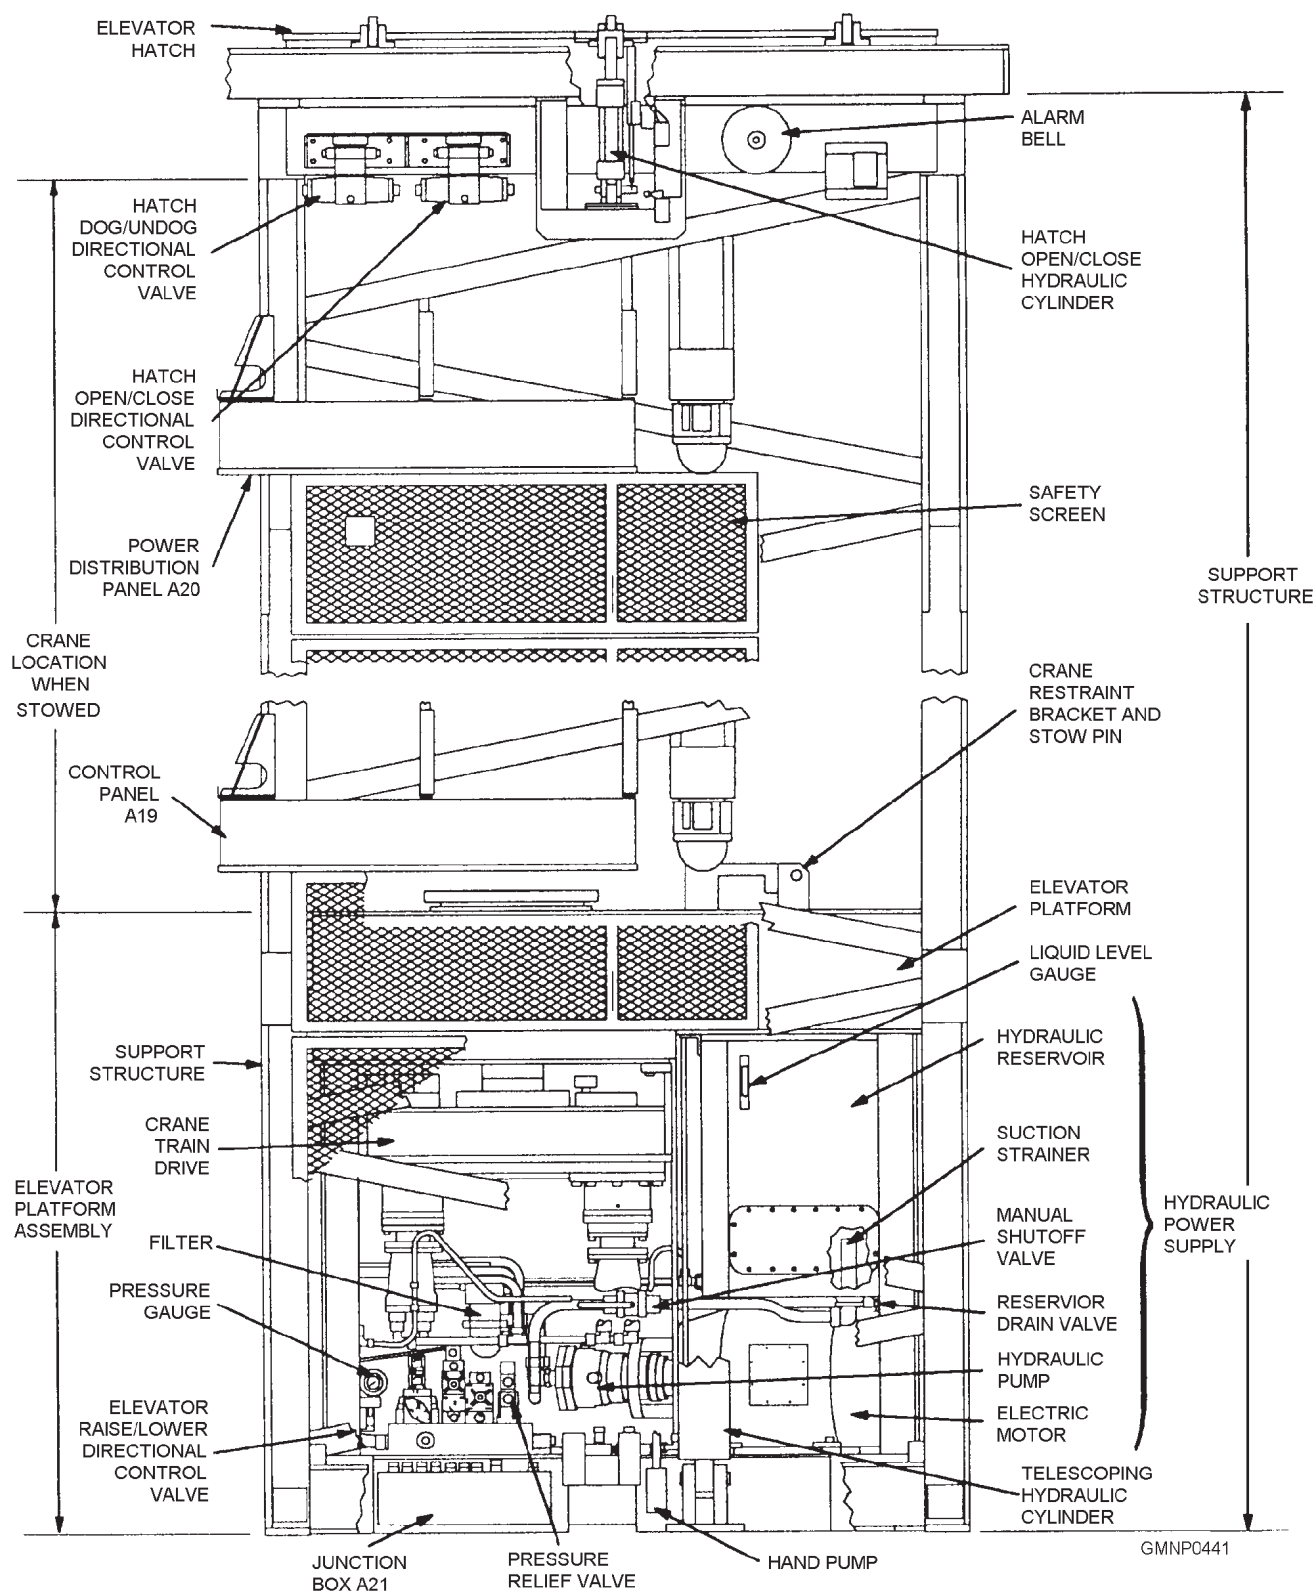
Elevator assembly Mk 2 Mod 0.
